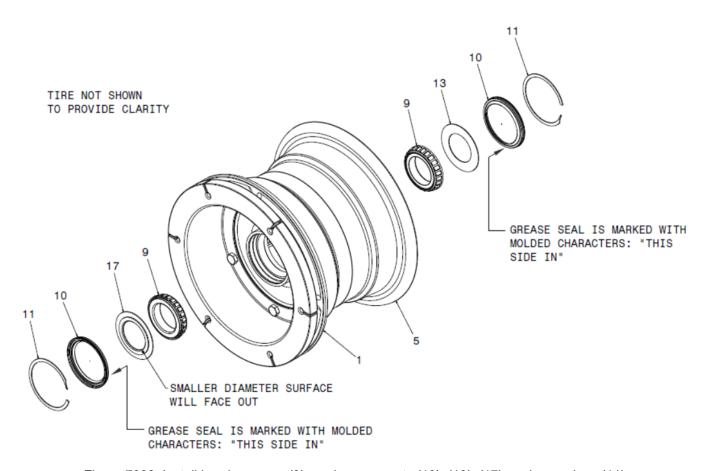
Install bearing cones (9), seal components (10), (13), (17), and snap rings (11)
